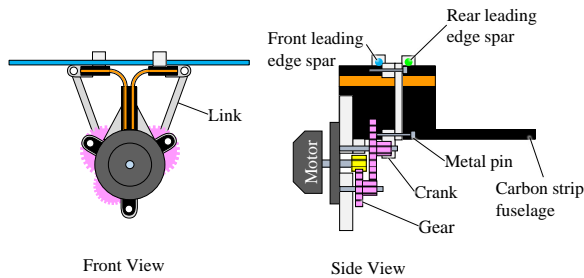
The double crank rocker mechanism with brushless motor and gearbox with 1:10.67 for the clapping mechanism.
